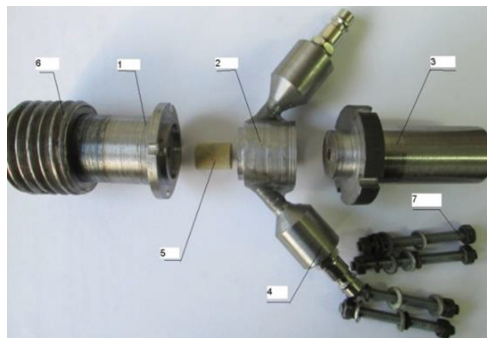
General view of the finished unit of the nozzle of new design (in disassembled condition): 1 - confuser; 2 - housing; 3 - diffuser; 4 - connecting pipe; 5 - porous permeable insert; 6 - connecting thread; 7 - turnbuckle.
